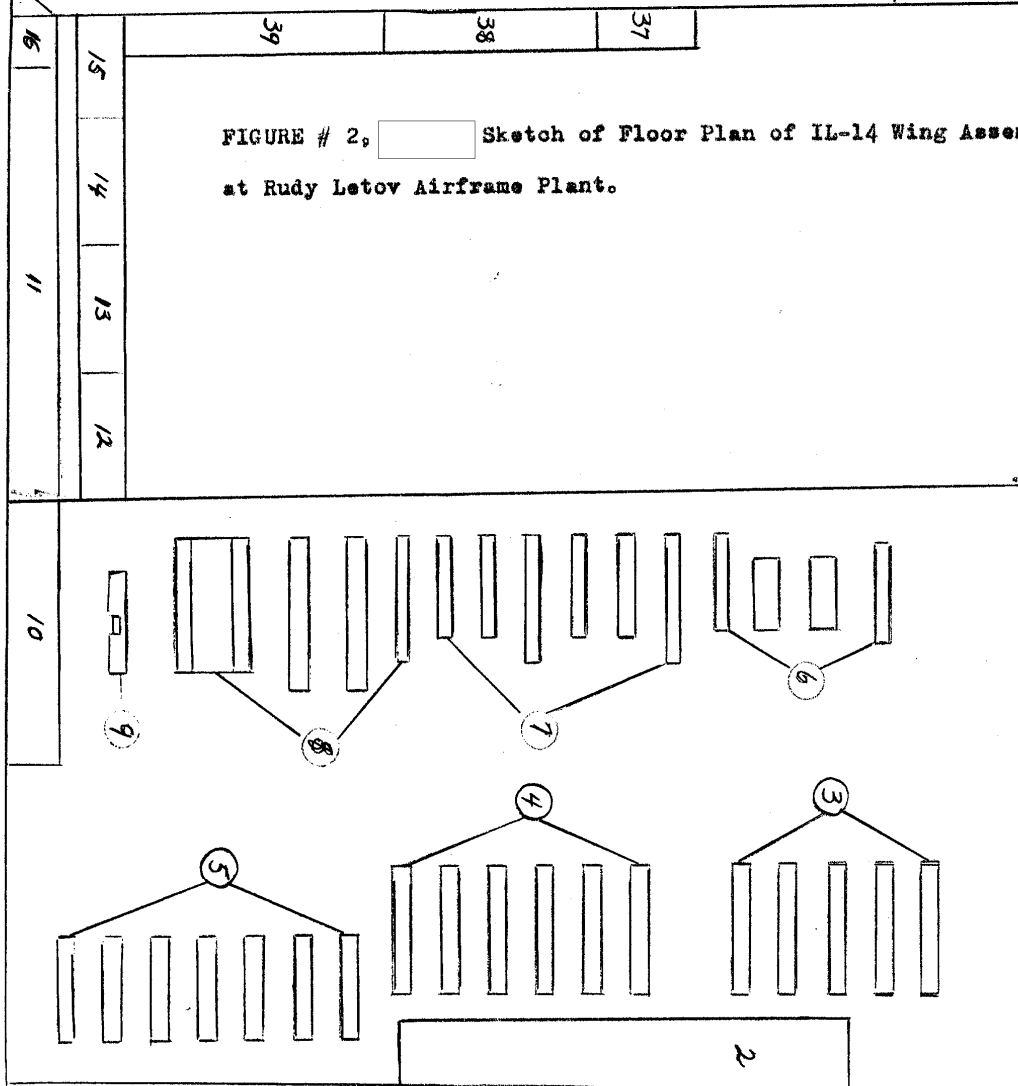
, Sketch of Floor Plan of IL-14 Wing Assembly
